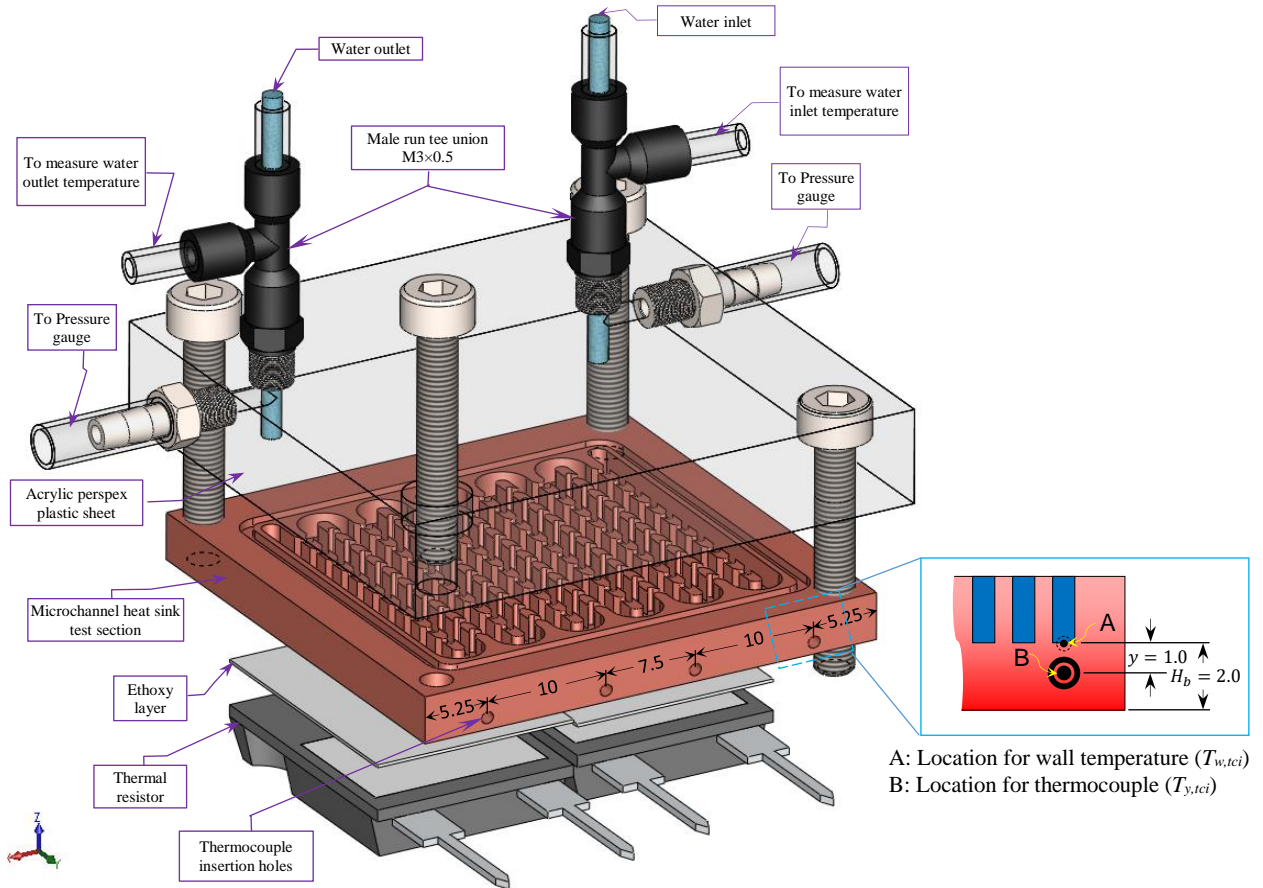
Exploded view of serpentine MCHS model with chevron fins.
